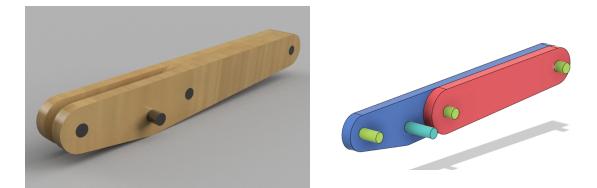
& 13: Figure 12 shows an isometric view of the isolated handle assembly,Figure 13 on the right shows the same assembly with each unique component colored and the outer face hidden to show all components clearly.
